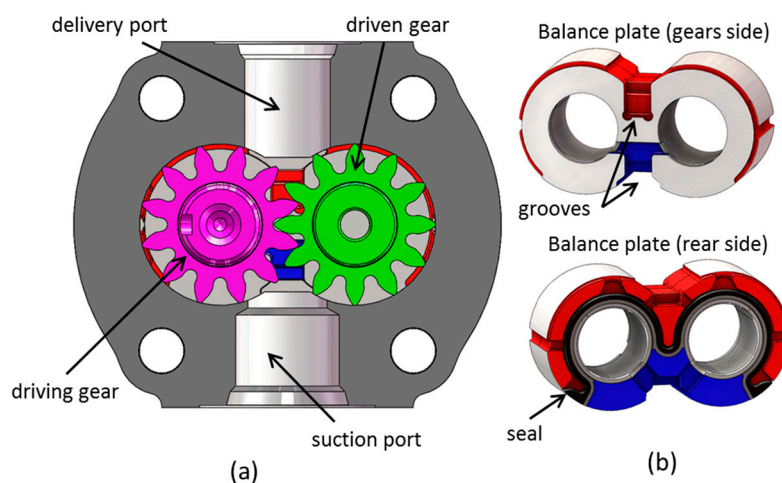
(a) Example of an external gear pump; (b) detail of the balance plates.
